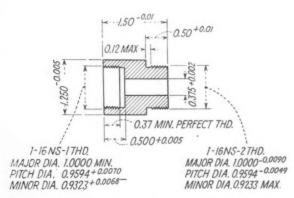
Production drawing of a steel coupling used as an example. The gages described in this article are dimensioned for use on this part.
